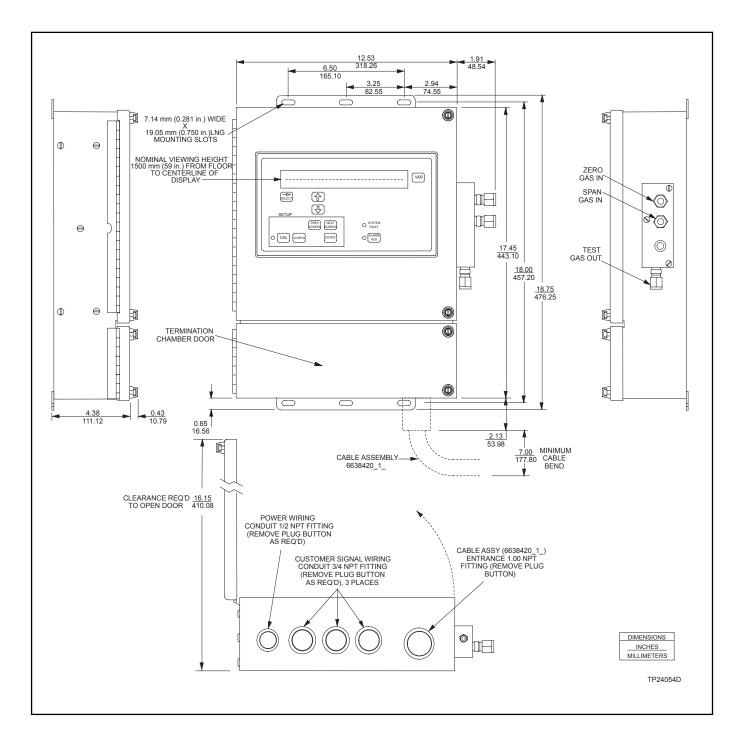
Outline and Clearance Requirements (Electronics Assembly)
